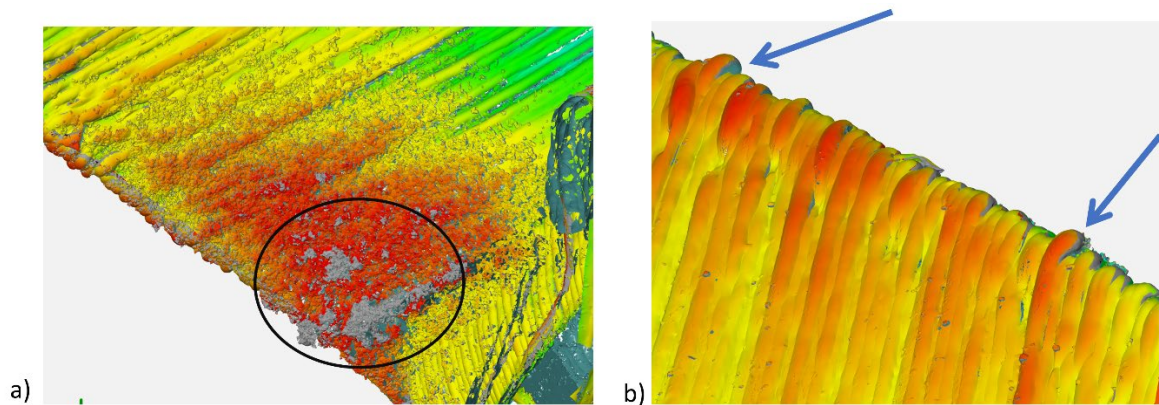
a) Splatter accumulation in black circle b) Surface waviness at edge of blade with regions where the weld bead is overflowing
